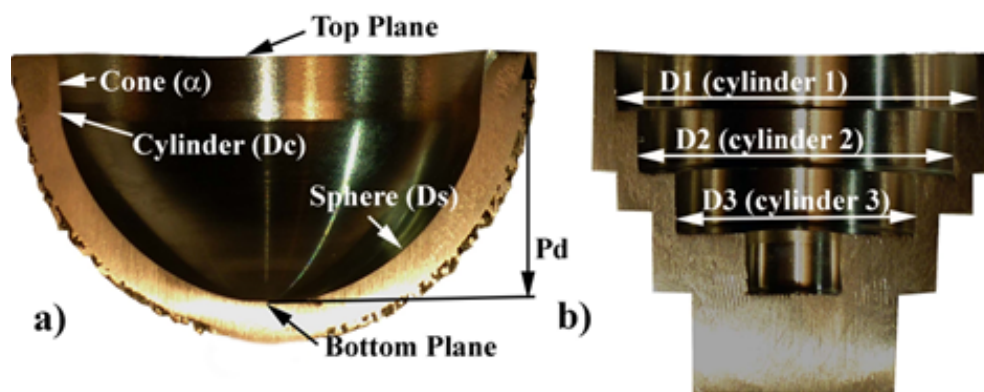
Nominal geometry machined on the: (a) acetabular cup; (b) test specimen.
